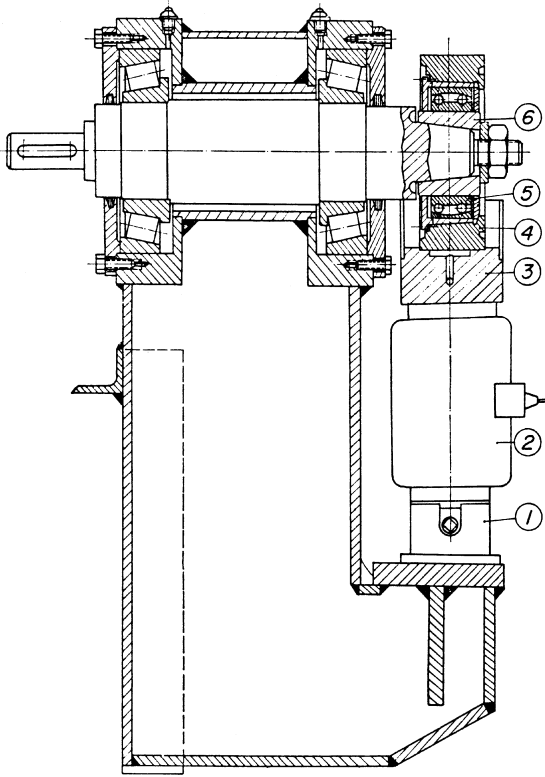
Friction-testing machine with a hydrostatic pad. (From Harnoy, 1966).
